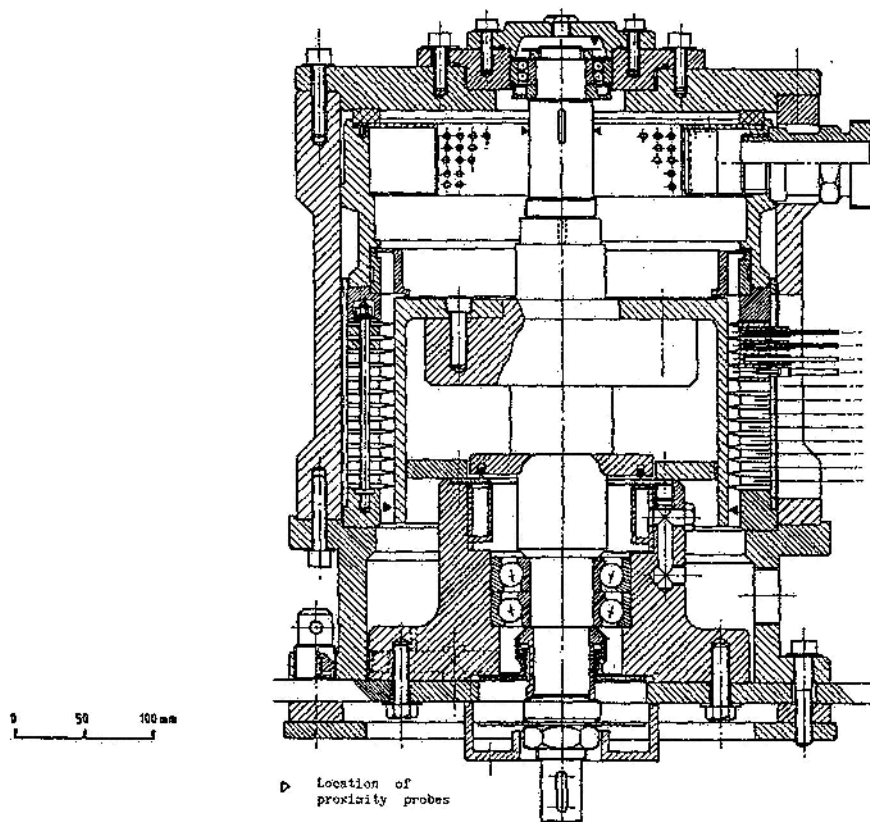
Sectioned assembly drawing of test rig (main assembly)
